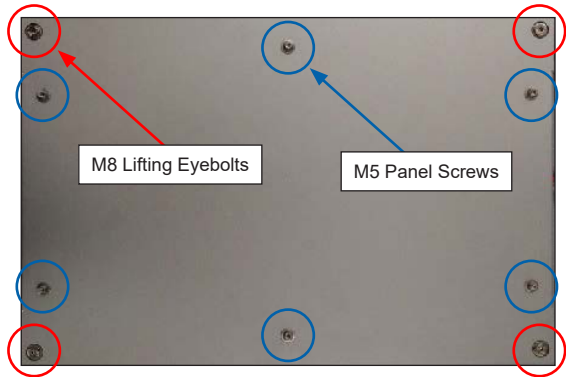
Attaching Points for M8 Lifting Eye-bolts, Top Pen View
